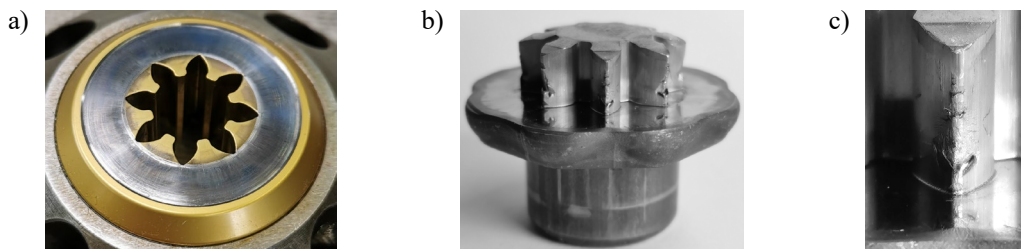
a) Trimming die without indentation (reference), b) pressed part with cracks and c) detail of tooth tip.
